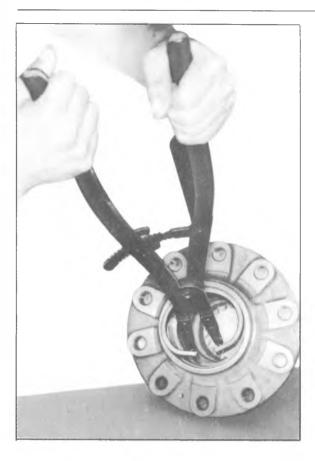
B-37--Removing Hub Outer Bearing Retainer Ring
